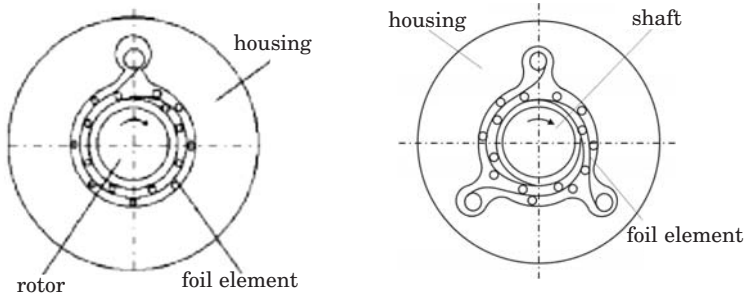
Structural diagram of the tested bearings. On the left – a spiral foil bearing (HOU et al. 2004); on the right – a multileaf bearing
